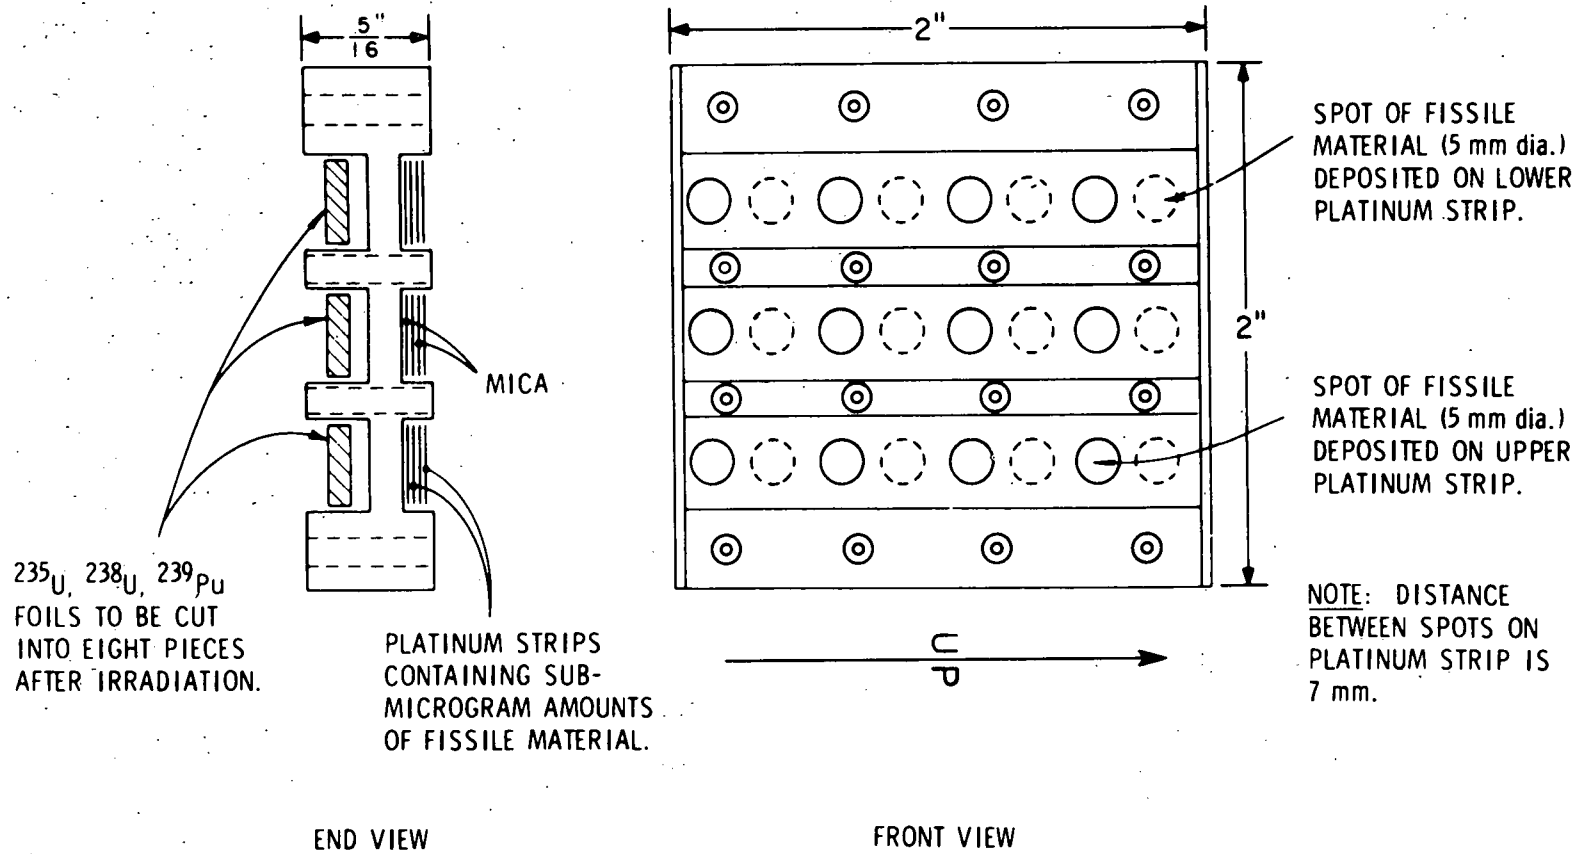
Cutaway End and Front View of Fission-yield Packets
